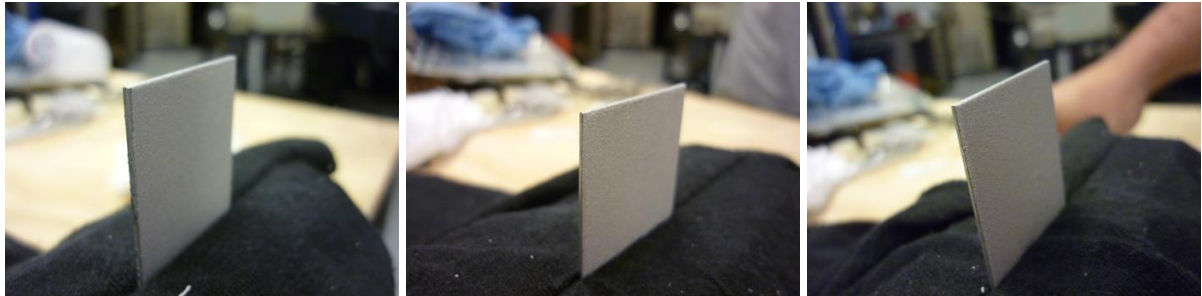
Pure aluminum strip rupture samples prior to bending (coating on aluminum IVD coating).
